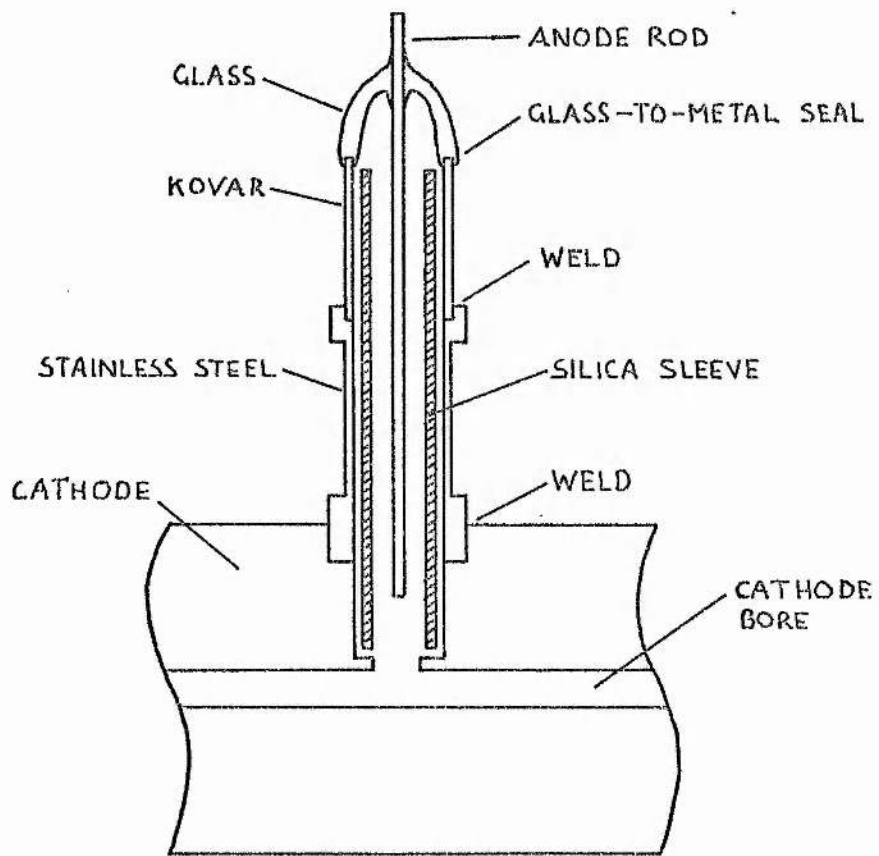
ANODE ASSEMBLY FOR TUBE No. 16.
